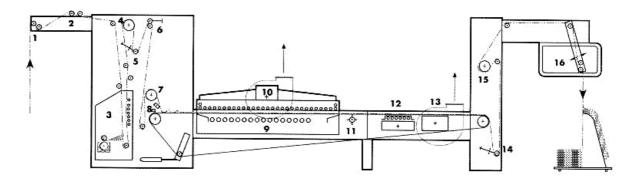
Steaming-shrinking unit: 1) double braking bar; 2) fabric centring device; 3) dampener;
